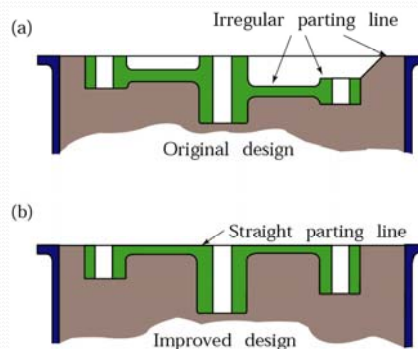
Redesign of a casting by making the parting line straight to avoid defects. *Source: Steel Casting Handbook*, 5th ed. Steel Founders' Society of America, 1980.
